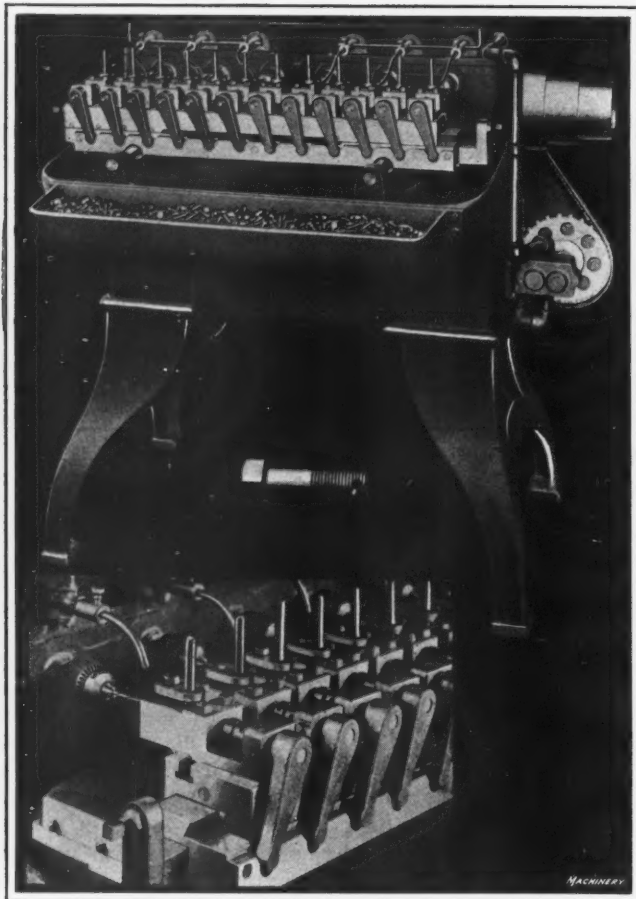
National-Acme Six-spindle Semi-automatic Drilling Machine with Double Work-holding Fixture which provides for loading Six Sections of Fixture while Work is being drilled in Other Six Positions
